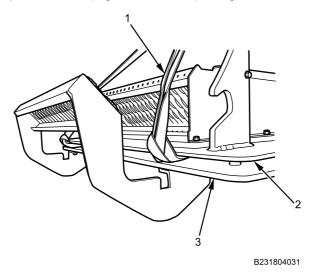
Loop Lifting Sling Around Door/Ramp Right Hinge.
